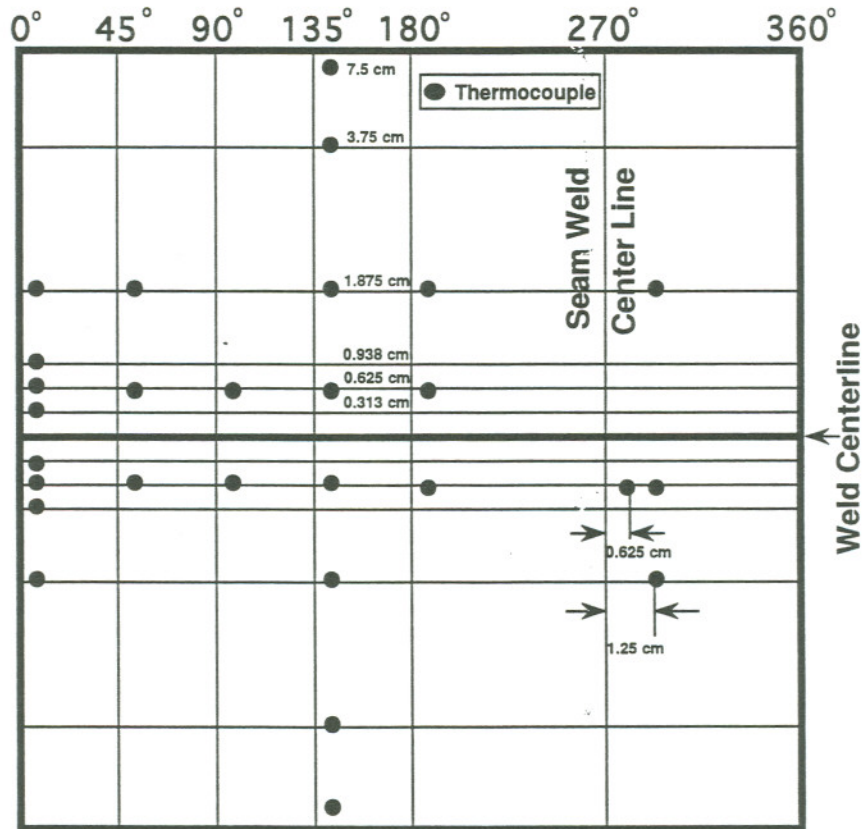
Layout of Thermocouples on the Inner Surface of the AMI Pipe Weldment
